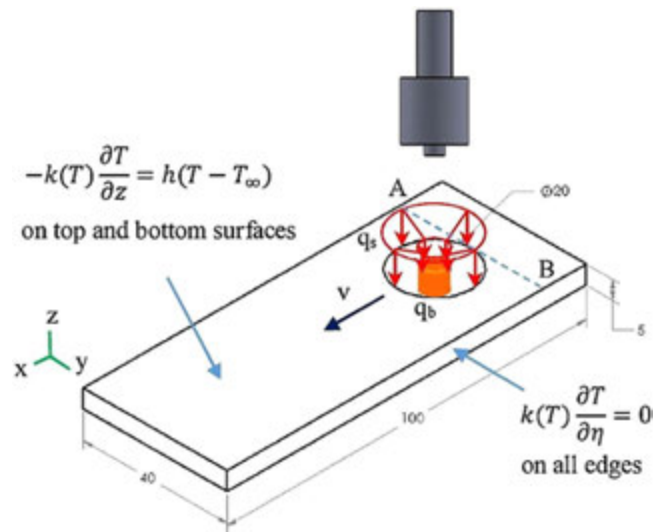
Schematic for numerical modeling used in the welding of HDPE-carbon black composite workpieces. Reproduced from Sheikh-Ahmad, J.Y., *et al.*, 2019. Friction stir welding of high density polyethylene – Carbon black composite. *Journal of Materials Processing Technology* 264 (4), 402–413.
